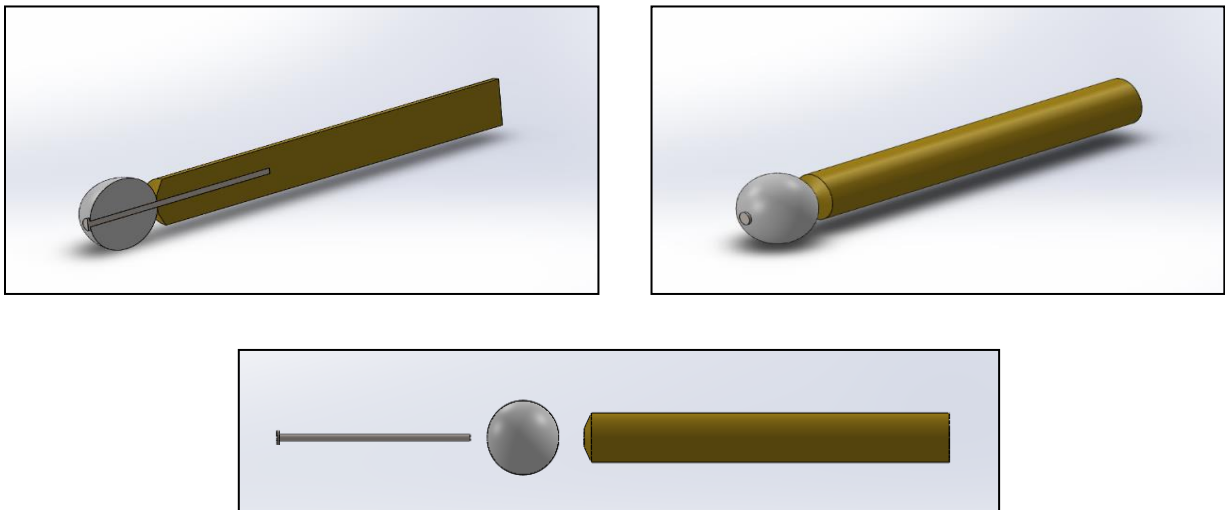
Image showing the a) cross section view, b) isometric view and c) exploded view of the polishing tool head assembly.
